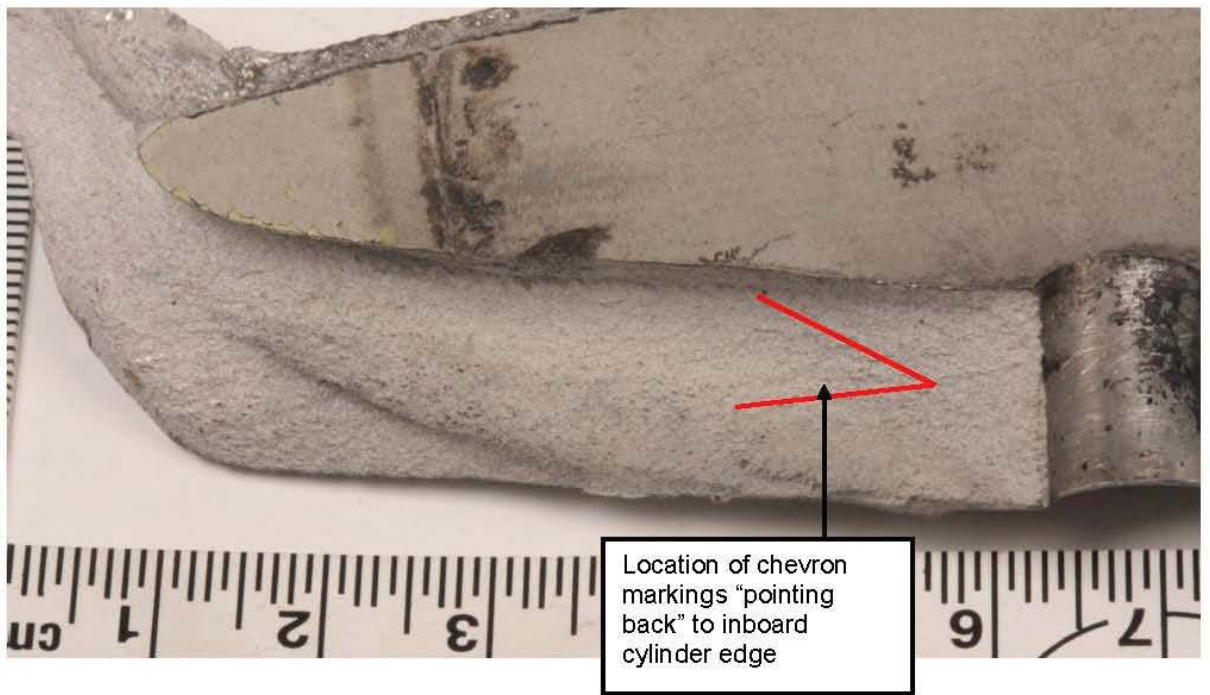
Showing the detail of fracture surface 'A2'.
